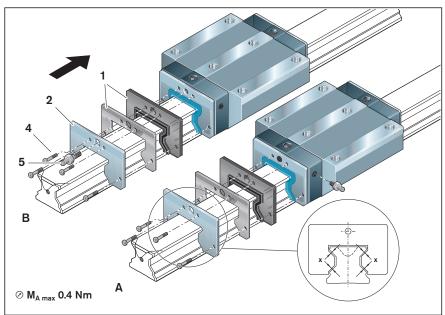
Mounting the FKM seal kit with metal scraper, size 65
